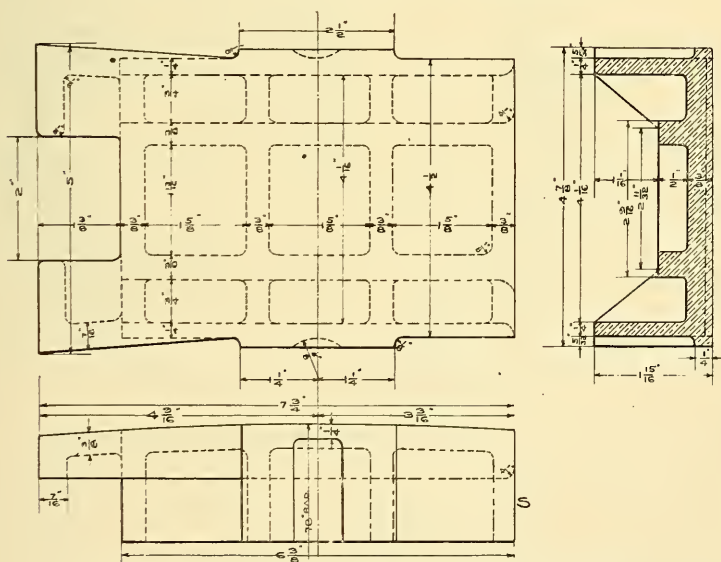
4 1/4 x 8 Journal Bearing Key for Cars of 30 Tons.
